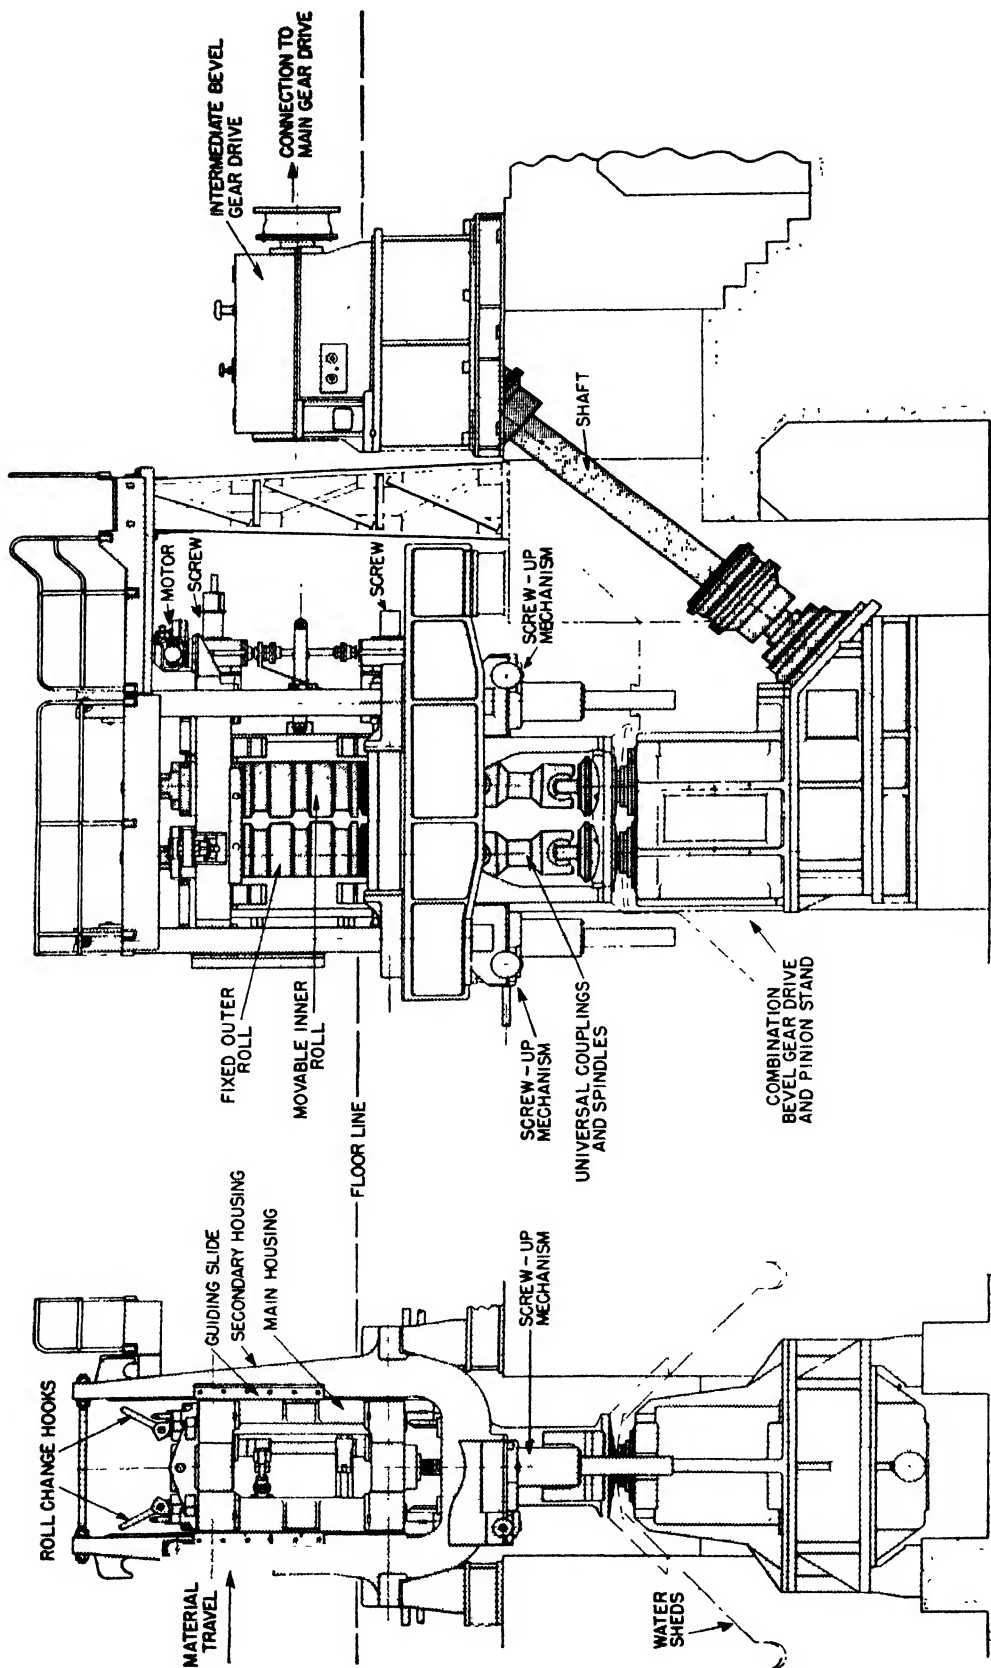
Schematic arrangement of the principal parts of one of the vertical stands of the six-stand continuous billet mill in the Lorain Works of National Tube Division of United States Steel Corporation.
